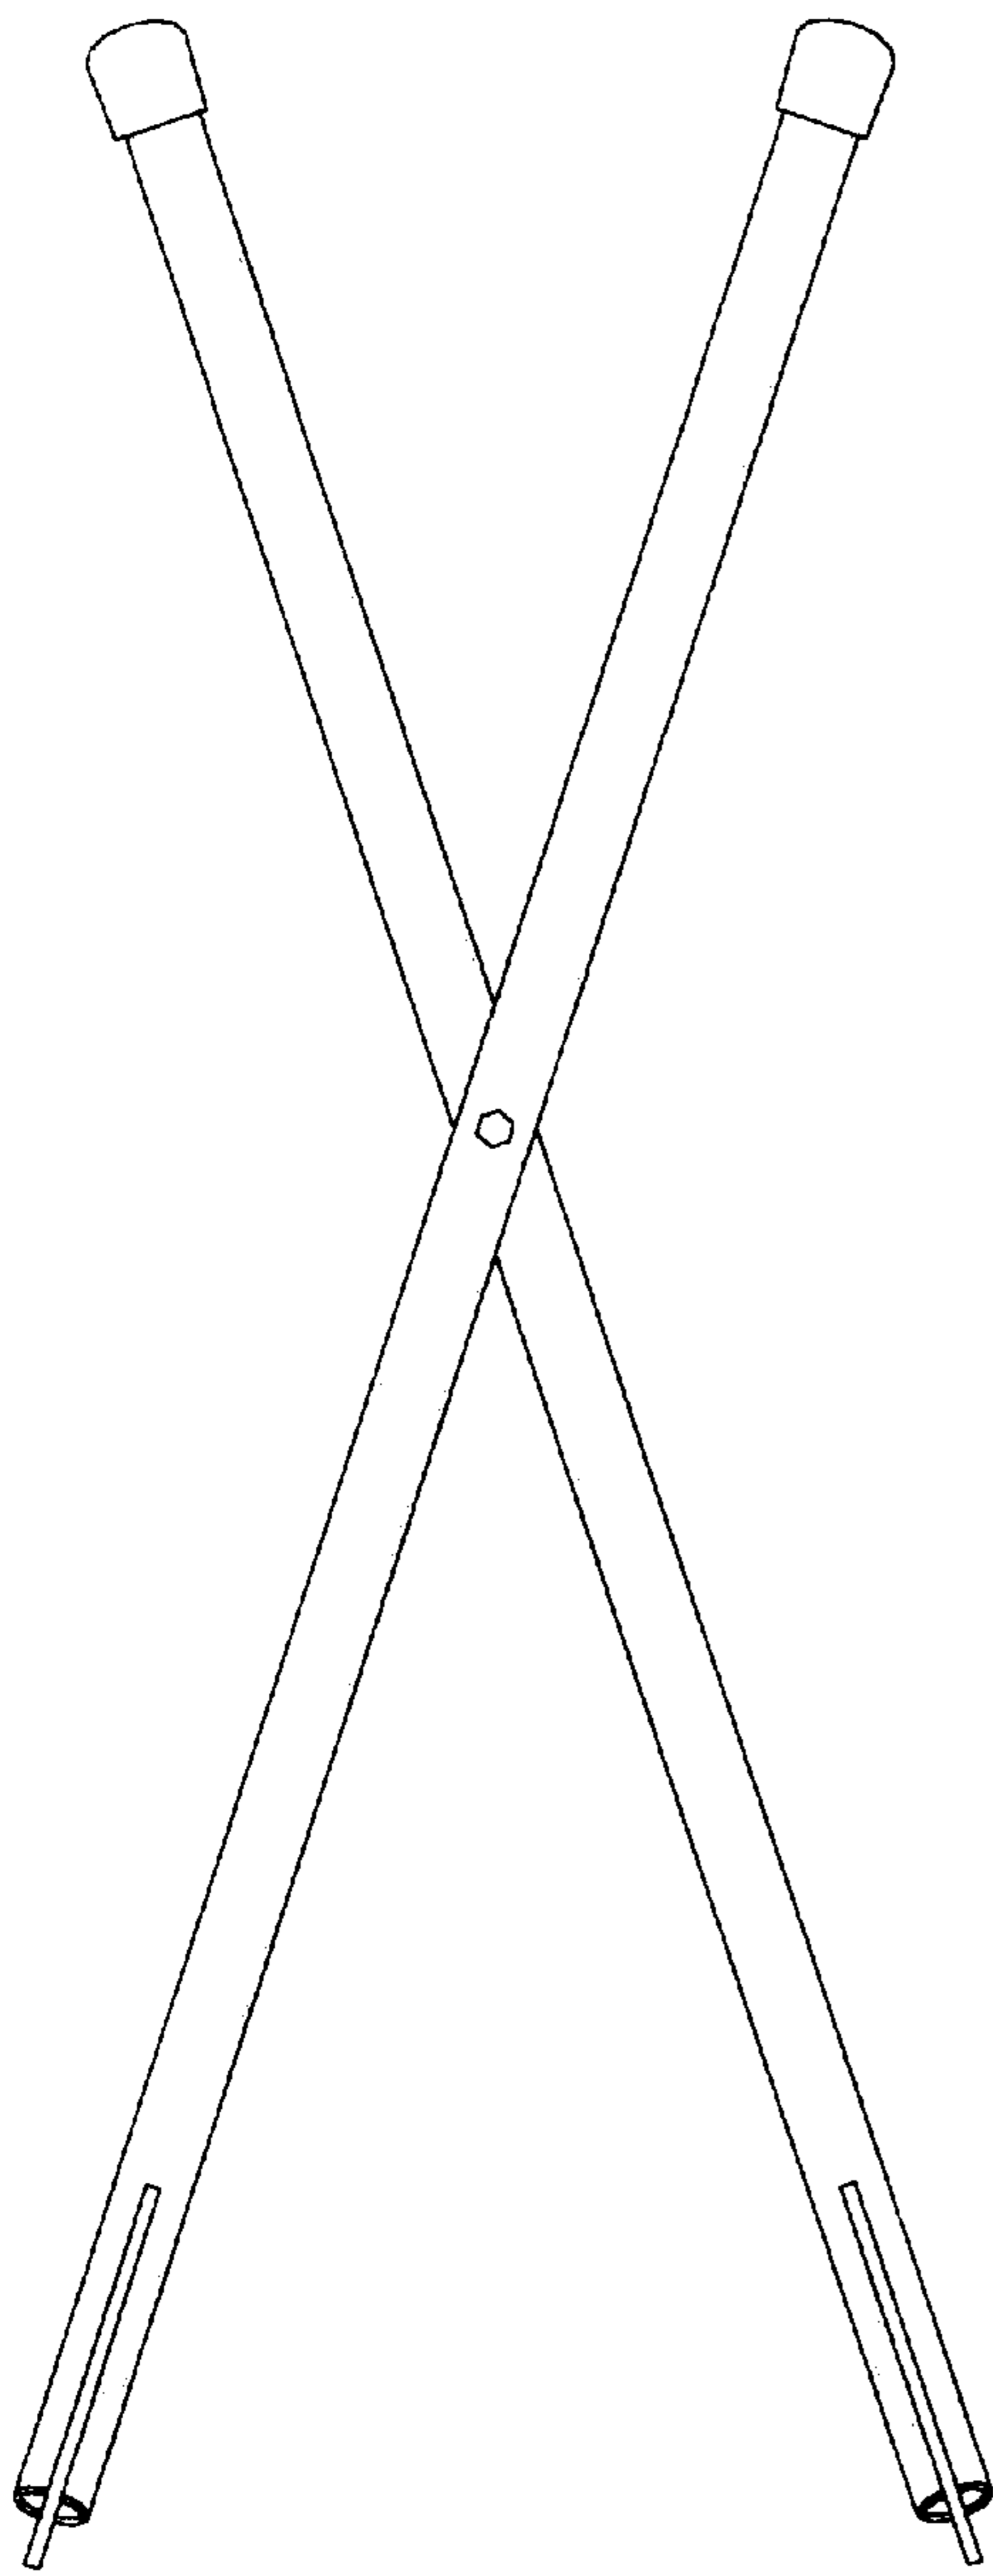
is a right side elevational view of the leaf pick up tool of FIG. 1;
